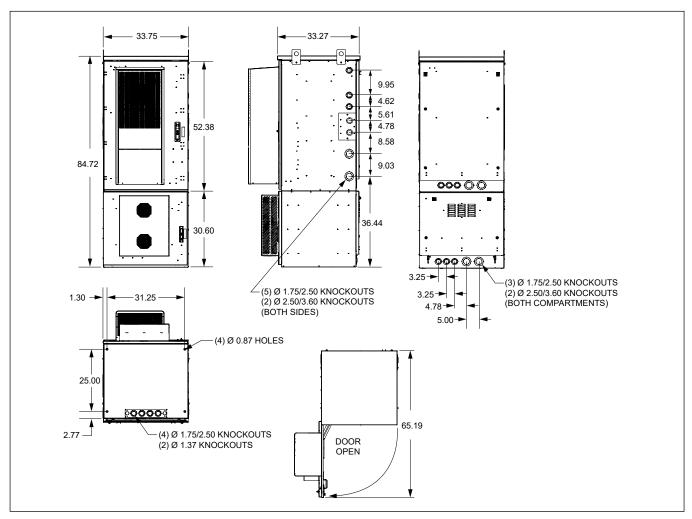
CUBE-SS4C228xxx Dimensions (in inches)
